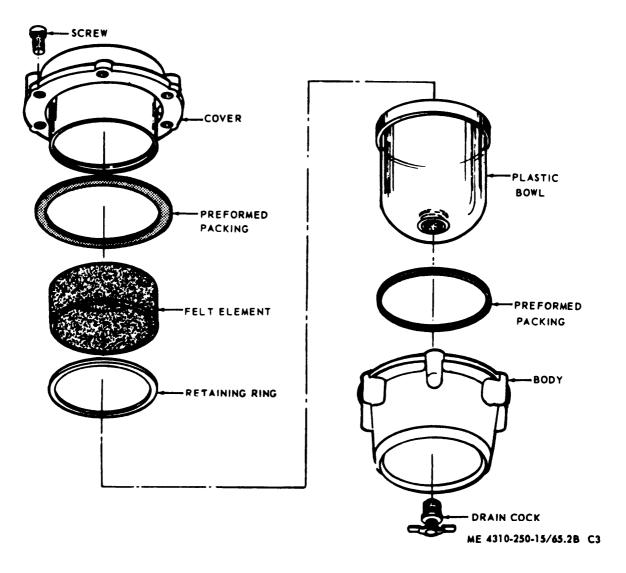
B. Moisture separator, dissasembly and reassembly.
